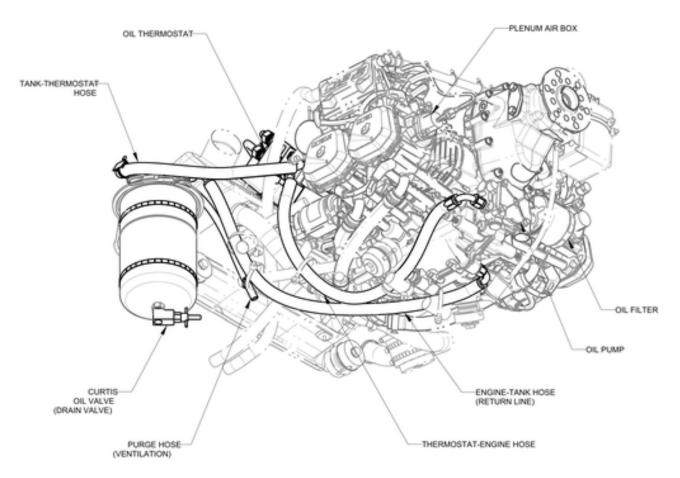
OIL SYSTEM COMPONENTS – BOTTOM, FWD, LHS VIEW
